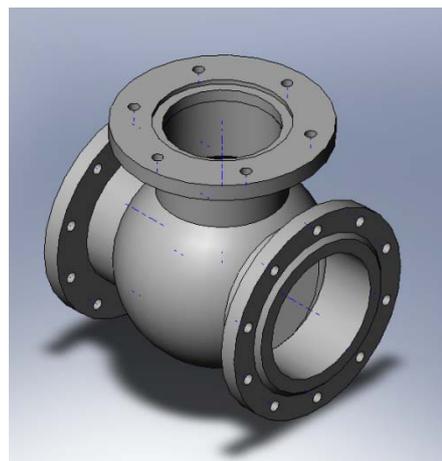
Body valve with diameter of the flange of 200 mm
